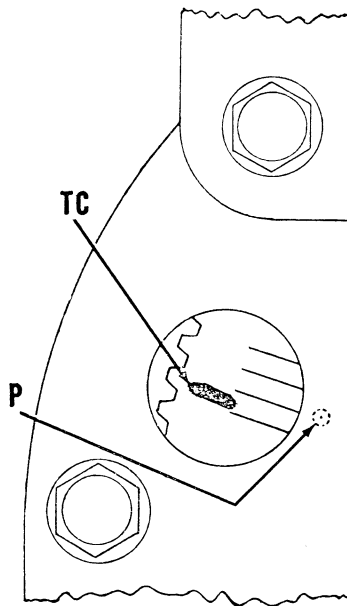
Distributor timing mark is indicated on flywheel face by painted mark TC as shown.
